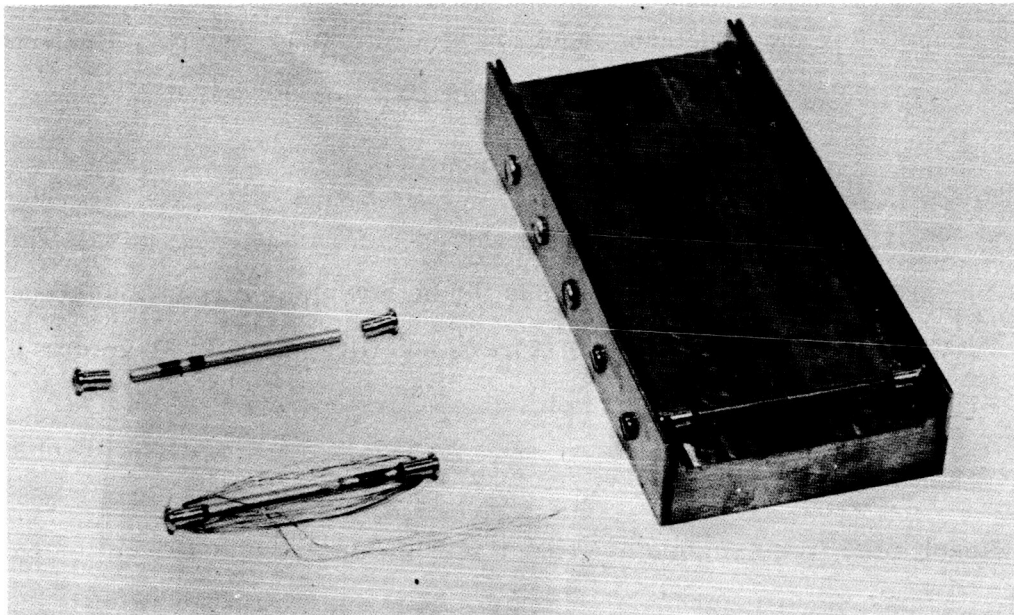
Material Sample Assembly and Bonding Fixture.
